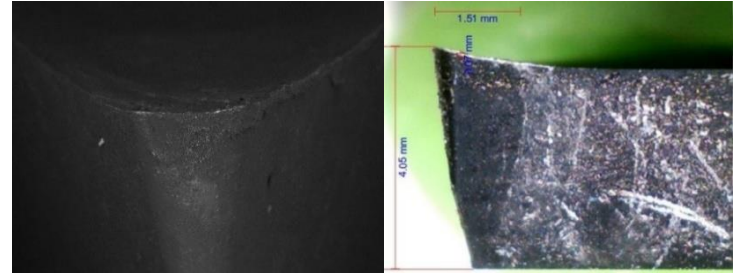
Abrasive wear during the initial wear stage of the diamond film-coated carbide tool in machining Al-6061, cutting speed 385 m/min; t<sub>c</sub> 1.74 min; VB 0.07 mm
